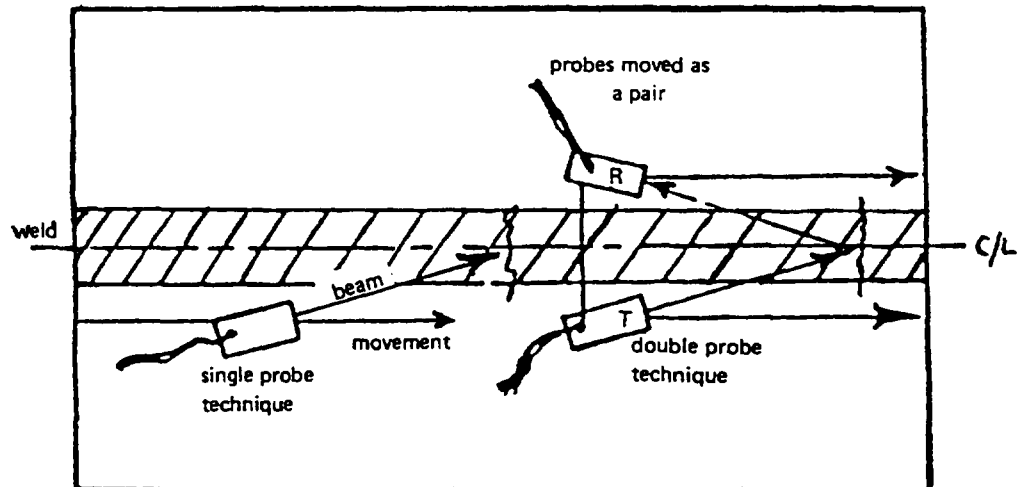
Weld scanning for transverse cracks.
